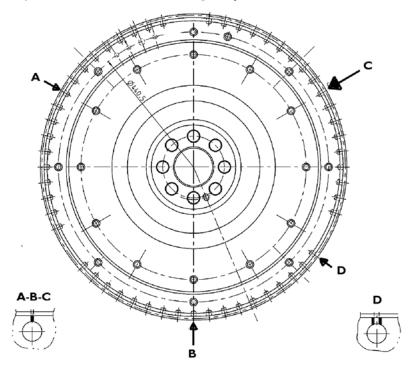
DETAIL OF PUNCH MARKS ON ENGINE FLYWHEEL FOR PISTON POSITIONS
